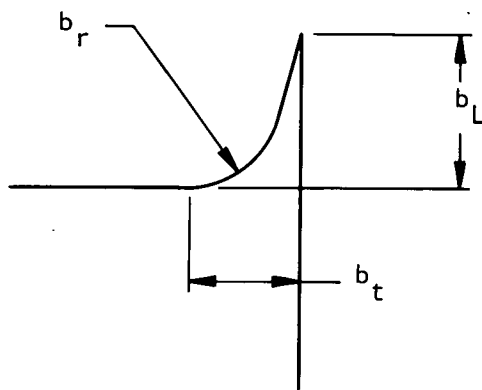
Cross Section of Typical Blanking and Some Machining Burrs
